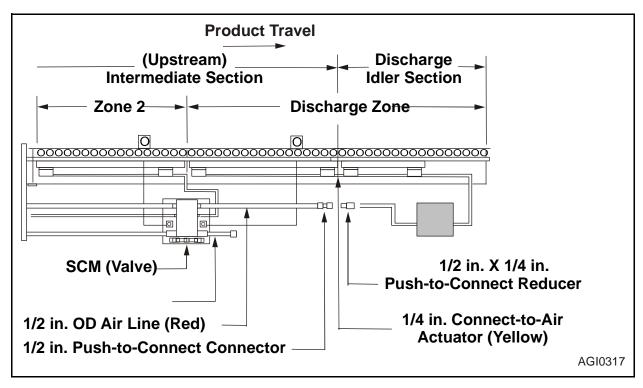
16 Discharge Zone Wiring/Piping Connection
